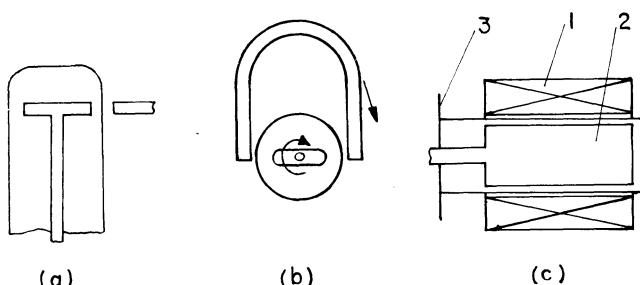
Rotary motion by outside magnet: (a) magnet placed inside and rotated by outside magnet; (b) armature rotated by outside horseshoe magnet; (c) shaft rotated by outside magnet (see Plate 21)
